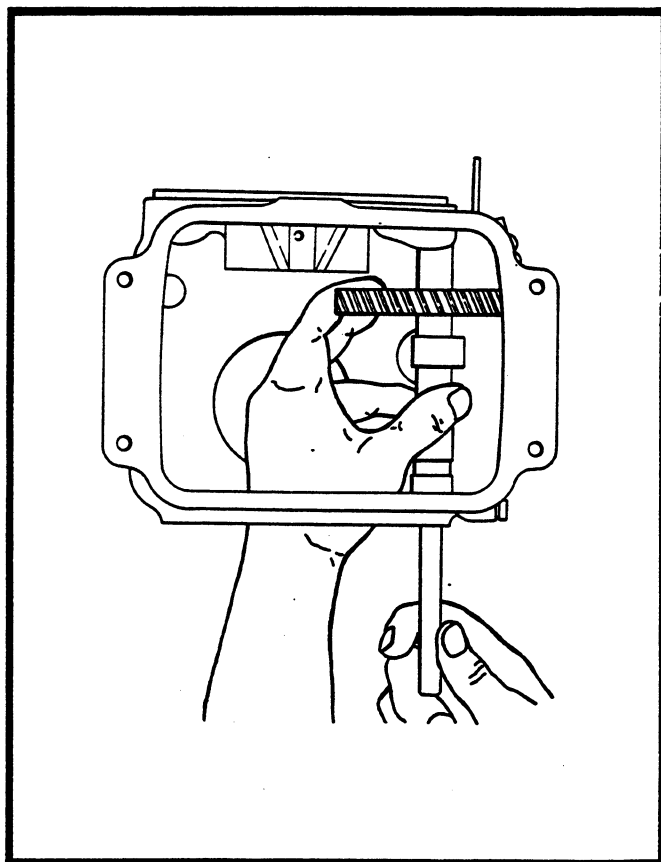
INSTALLING CAMSHAFT PIN
